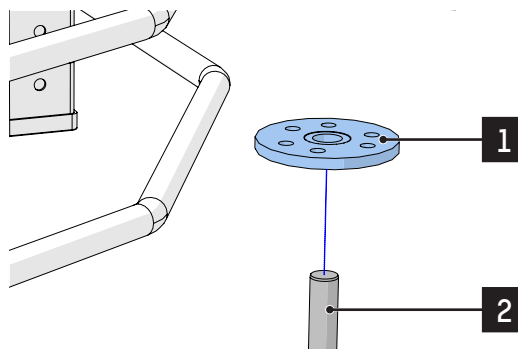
Fitting the lower flange of the TRS moving barrier
